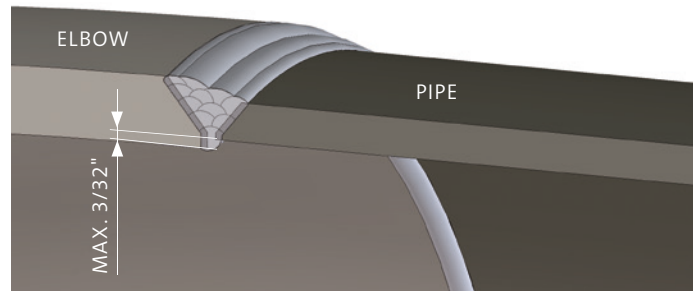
Minimum misalignment $< 3/32"$ (2.38 mm) using Erne Fittings high-precision segmentable elbows enabling pipe line production without back welding operations.
